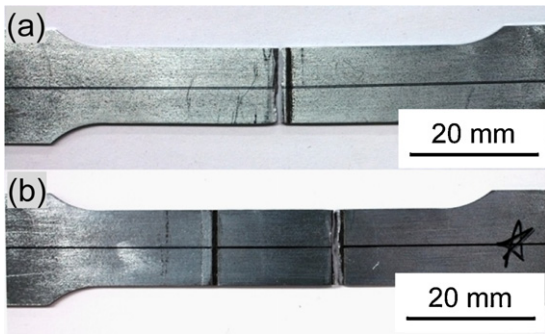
Typical fatigue failure locations of (a) a FLWed DP980-S joint, and (b) a FLWed DP980-M joint.
